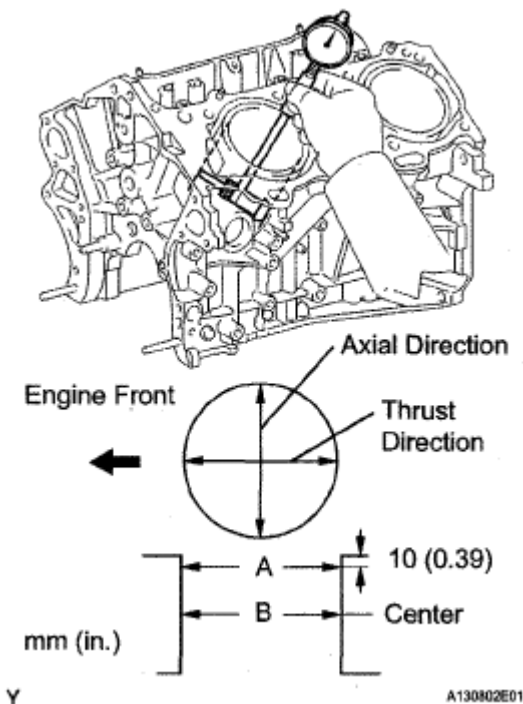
Measuring Cylinder Bore Diameter At Positions A And B
